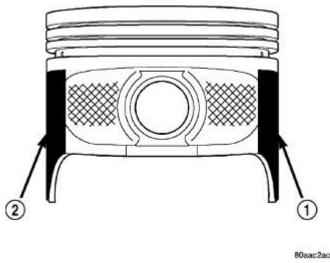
Identifying Moly Coated Piston Courtesy of CHRYSLER LLC
